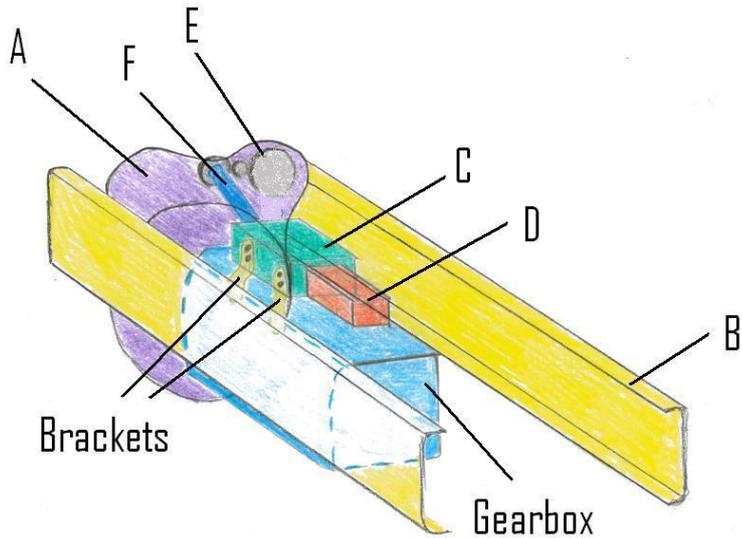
Concept 14. Both pumps are mounted on the gearbox with a cardan shaft connecting pump C to a transmission which in itself is mounted on the PTO.
